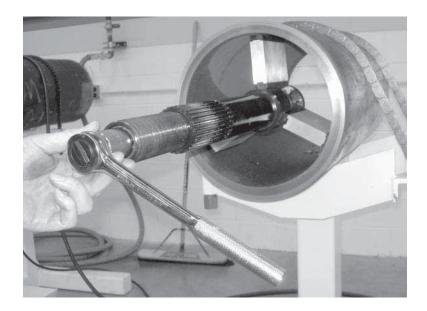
Turn the drawbar nut clockwise until the clamping legs are snug in the I.D. of the pipe.
